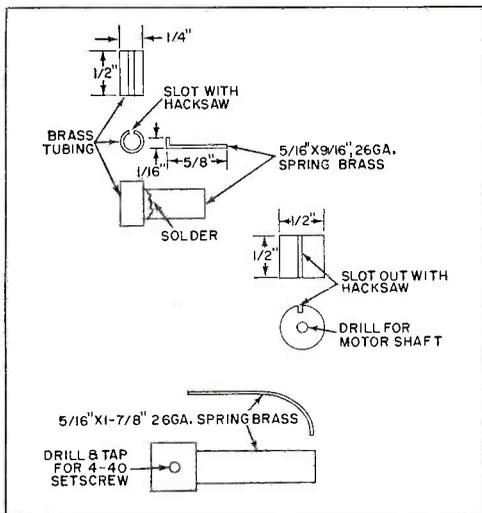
Contacts are made from strips of spring metal soldered to short lengths of tubing. Drill the rotating contact to fit snugly on the motor shaft.
